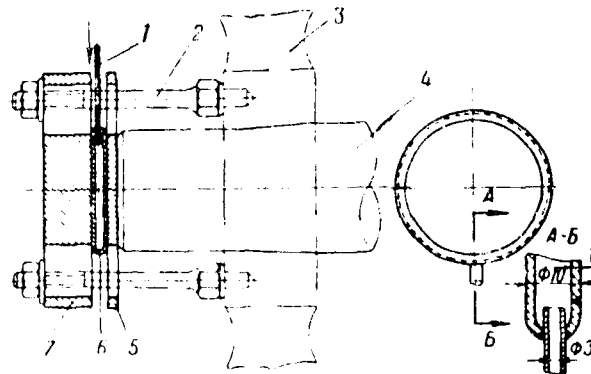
Removal of Propeller Screw by Hydraulic Packet: 1 - red copper tube; 2 - extruding pin; 3 - propeller hub; 4 - propeller shaft; 5 - intermediate disk; 6 - hydraulic packet; and 7 - supporting disk.
